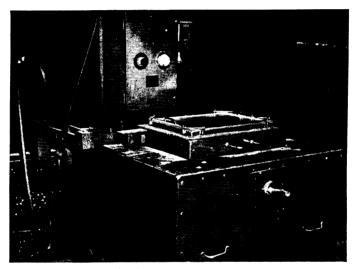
Fluoroscopic setup for inspection of die castings. The advantage of this type of inspection, compared with X-ray inspection, is that it is much cheaper and faster. Sensitivity is not so good, however.
